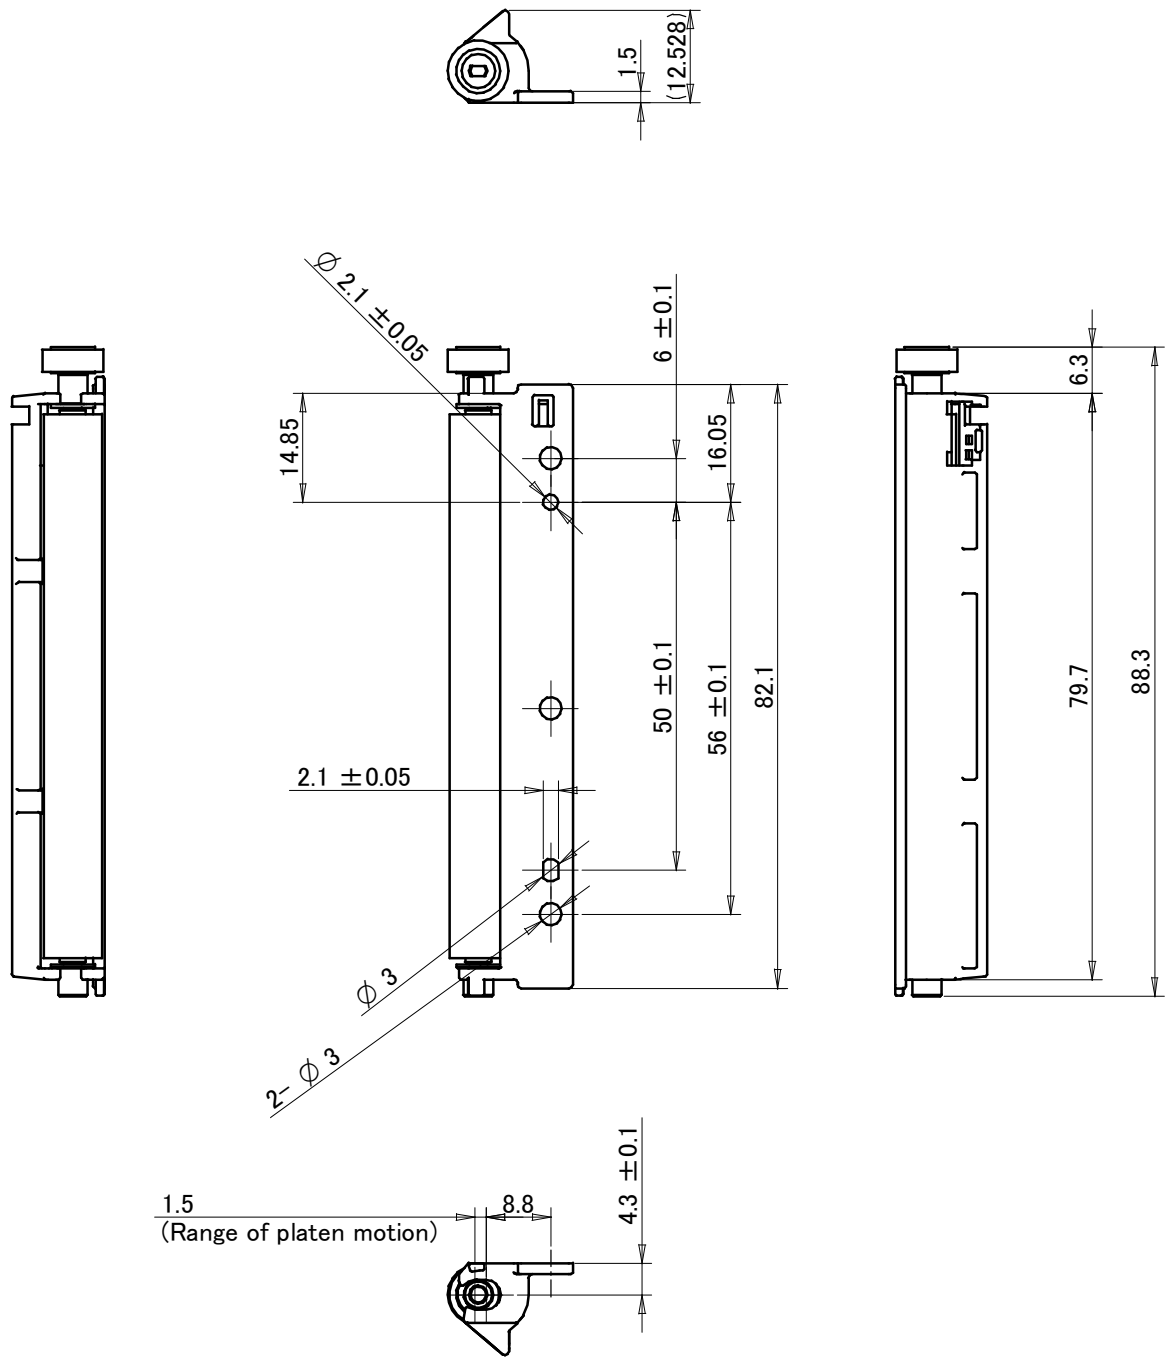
shows external dimensions of the platen block for LTPD247 and Figure 7-2 and Figure 7-3 show external dimensions of the printer LTPD247A and LTPD247B.
